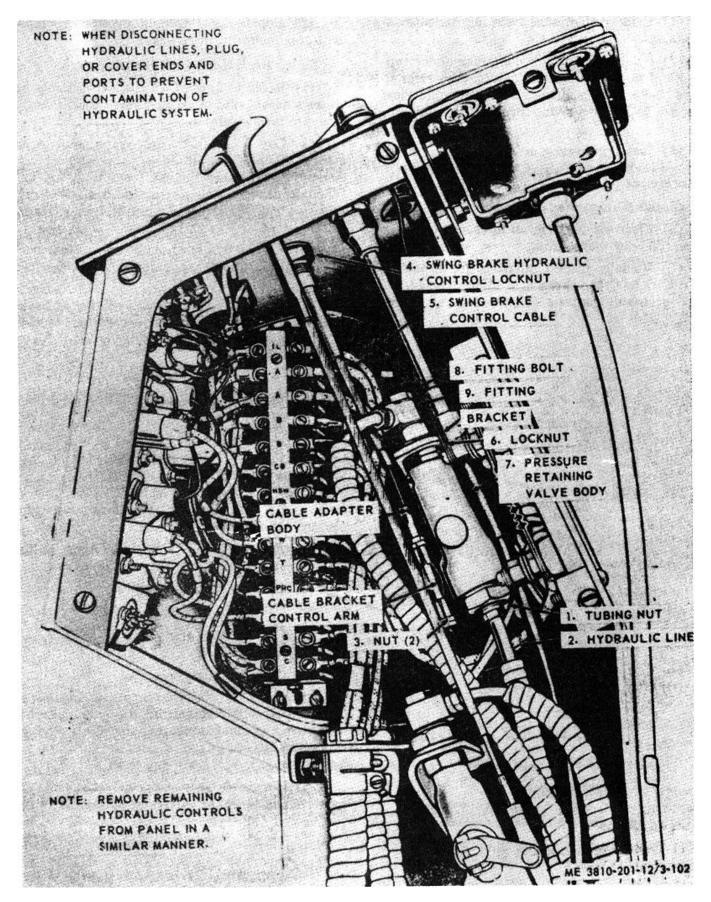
Swing and propel shifter lever and linkages removal and installation.
